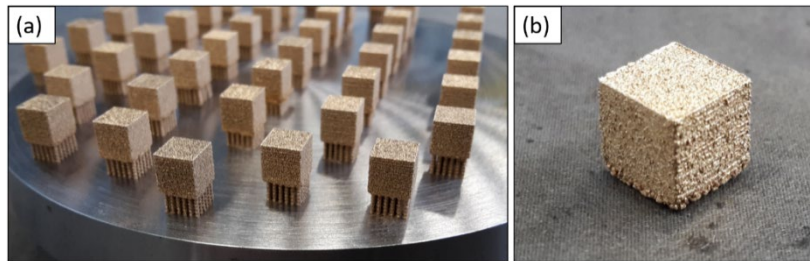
Cubic specimens: (a) with support structures on building platform; (b) after removal from platform
